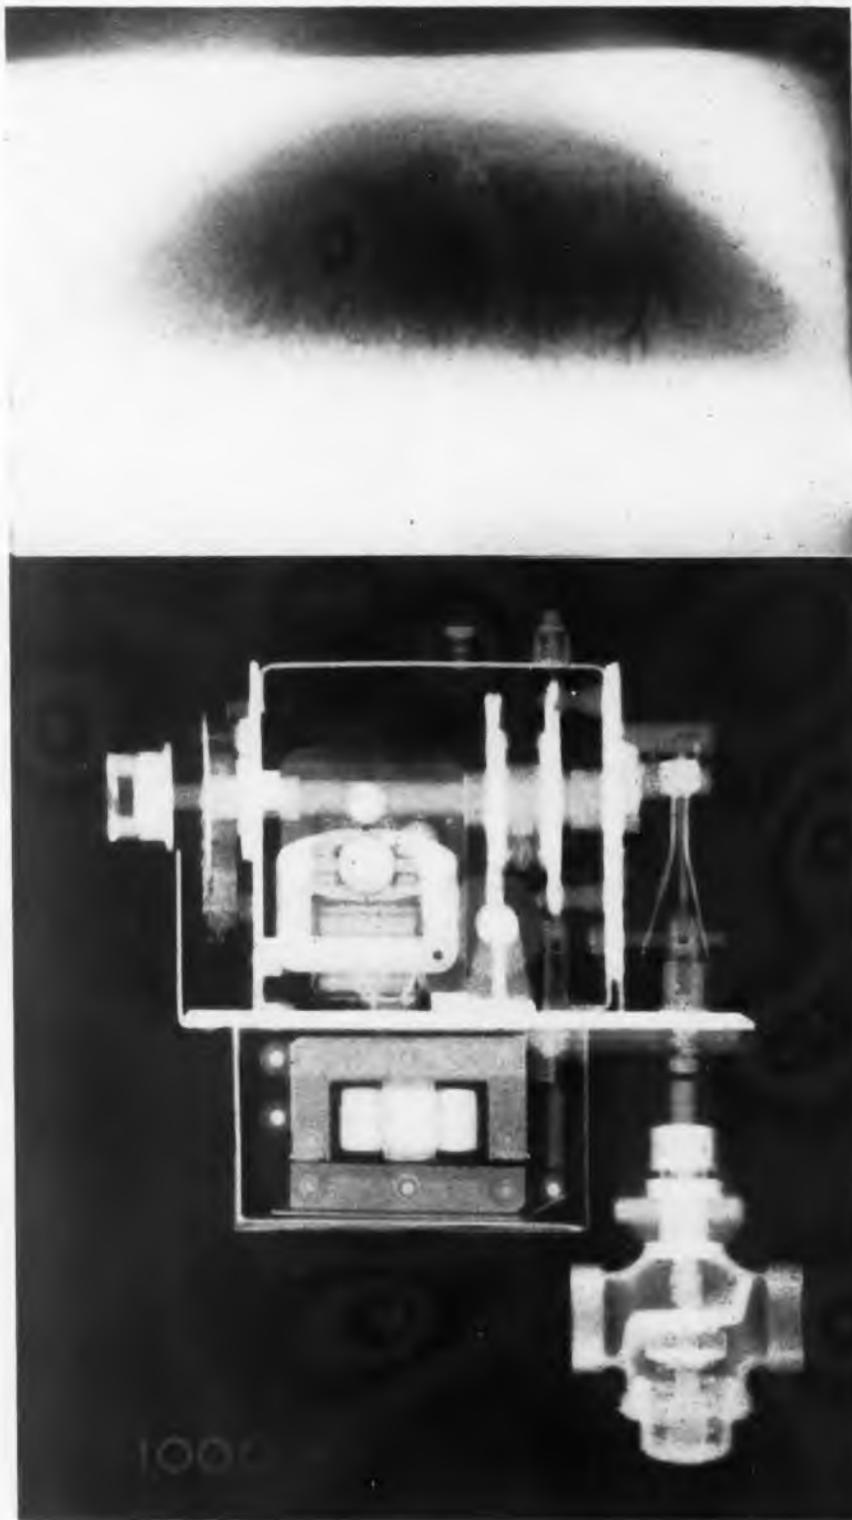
(Above)—This radiograph, made at one million volts, shows a section of a steel casting four inches thick and reveals a large area where excessive shrinkage has occurred. Fig. 8 (Lower)—Illustrating the uniform penetration of all parts within the mechanism when radiographs are made of a complicated composite machine
